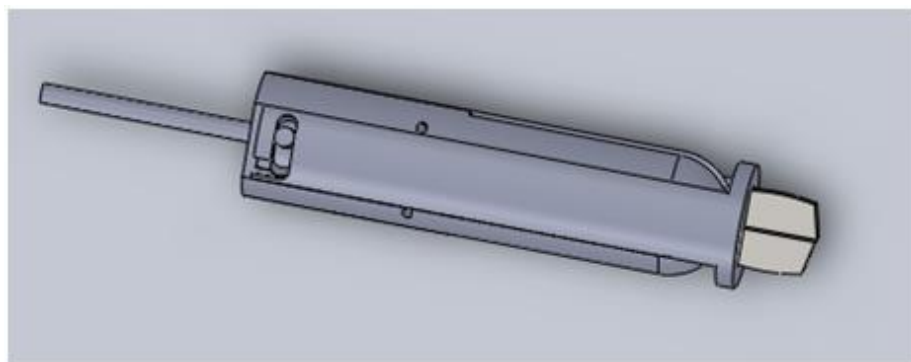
External View of the Cable Free Model Cutting Head.
